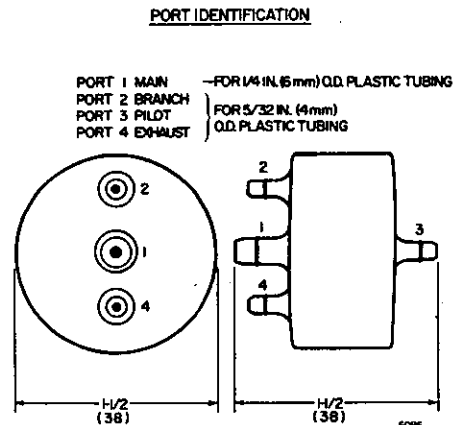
RP970A Dimensions in Inches (Millimeters).
